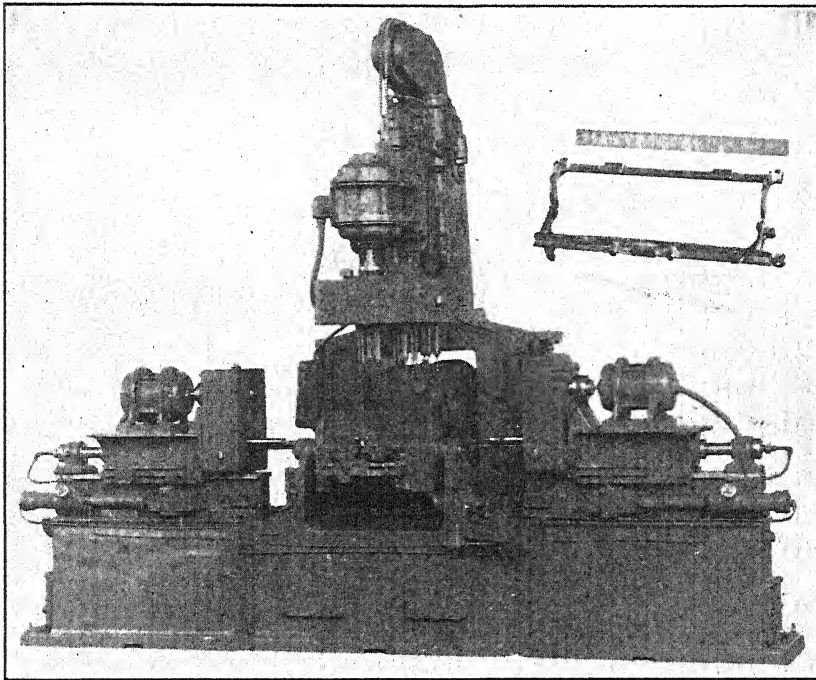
A National Automatic Tool Co. Four-Way Hydraulic Drilling Machine with Trunnion-Type Jig.
